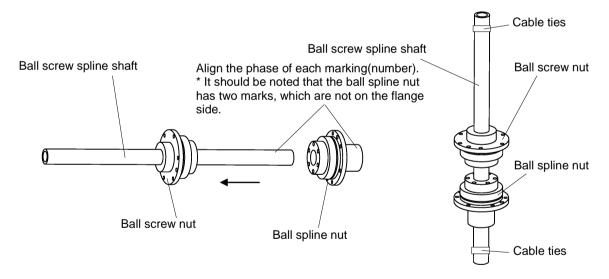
Ball screw spline nut (KHL-500, KHL-600, KHL-700)
